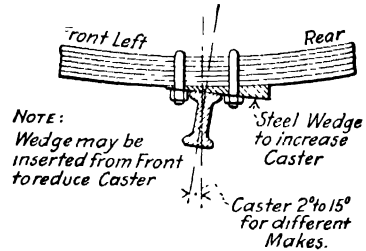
Adjusting "Caster Set" of Front Wheels.
